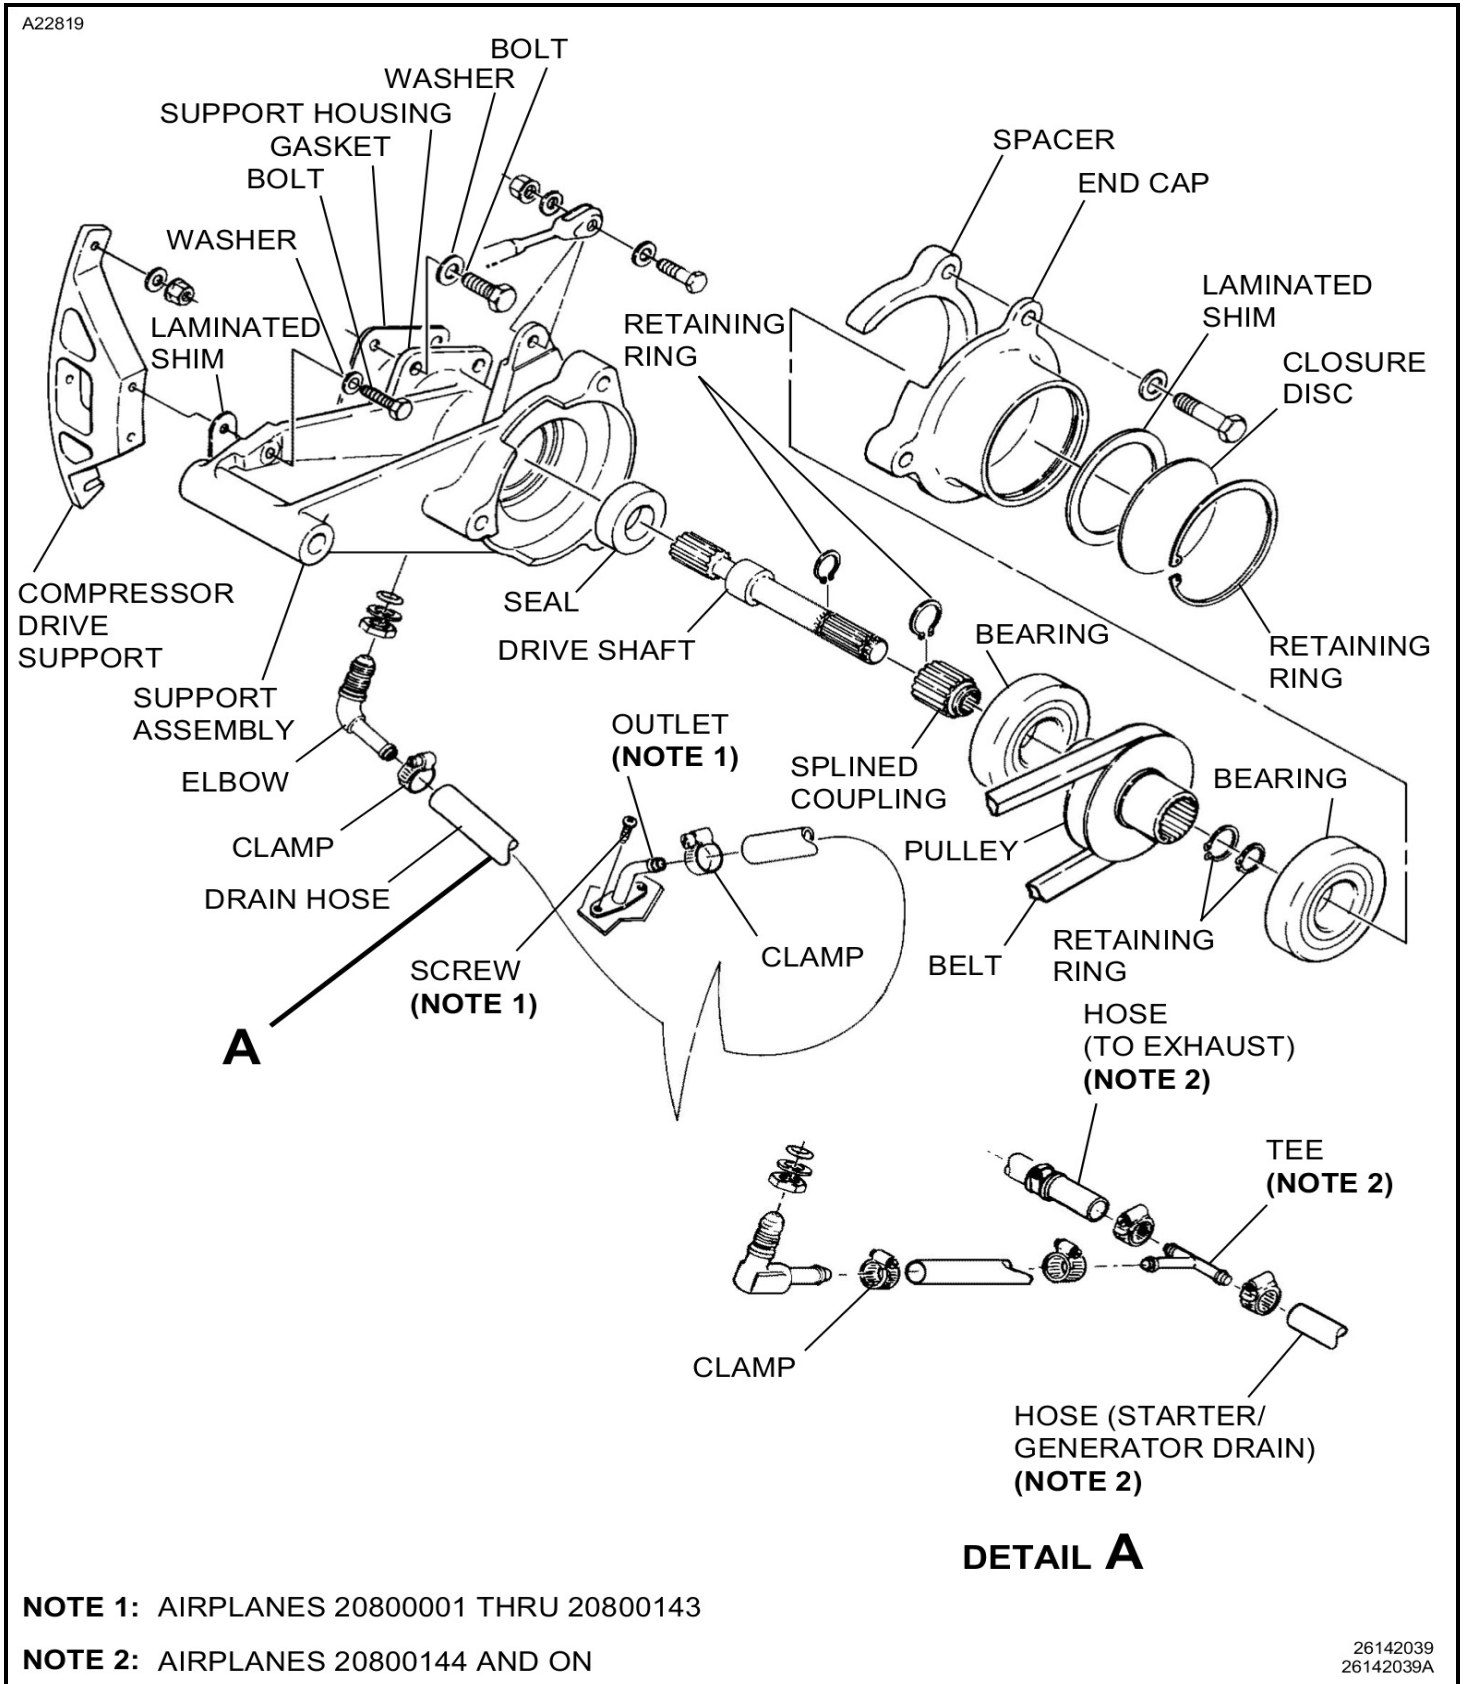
Sheet 1 : R134a Compressor Drive Unit Installation
